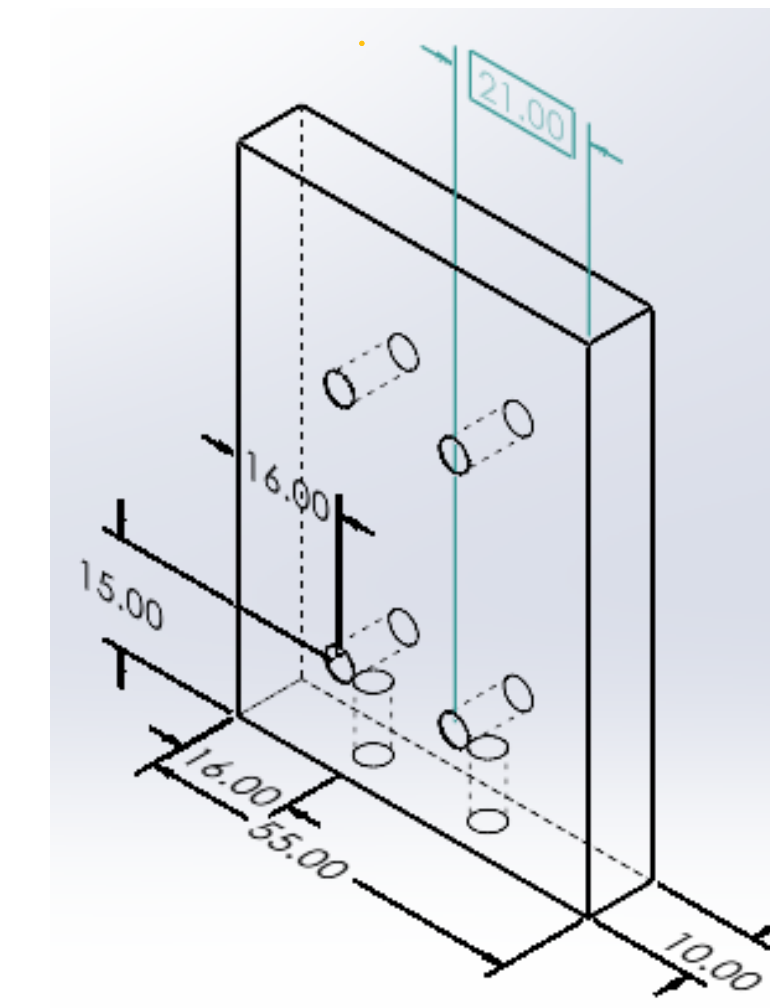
CAD diagram of platform attachment to microscope (units mm)
